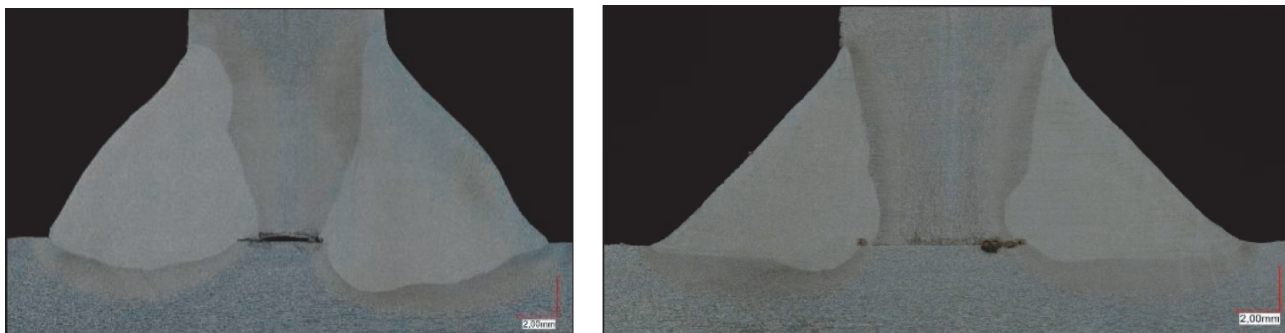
Macrostructure of the MAG STANDARD (M6) and MAG TANDEM-welded joints (T2); welding parameters used in the TANDEM process:  $I_{d1} = 265-275$  A,  $I_{d2} = 233-255$  A,  $U_{d1} = 27.5-28.5$  V,  $U_{d2} = 27.5-28.5$  V;  $V_{e1} = 14$  m·min<sup>-1</sup>,  $V_{e2} = 11$  m·min<sup>-1</sup>;  $V_s = 0.6$  m·min<sup>-1</sup>;  $E_1 = 1.15$  kJ·mm<sup>-1</sup>; welding parameters used in the MAG STANDARD process:  $I_s = 266-288$  A;  $U_s = 30.2-30.9$  V;  $V_e = 11$  m·min<sup>-1</sup>,  $V_s = 0.27$  m·min<sup>-1</sup> and  $E_1 = 1.49$  kJ·mm<sup>-1</sup>
